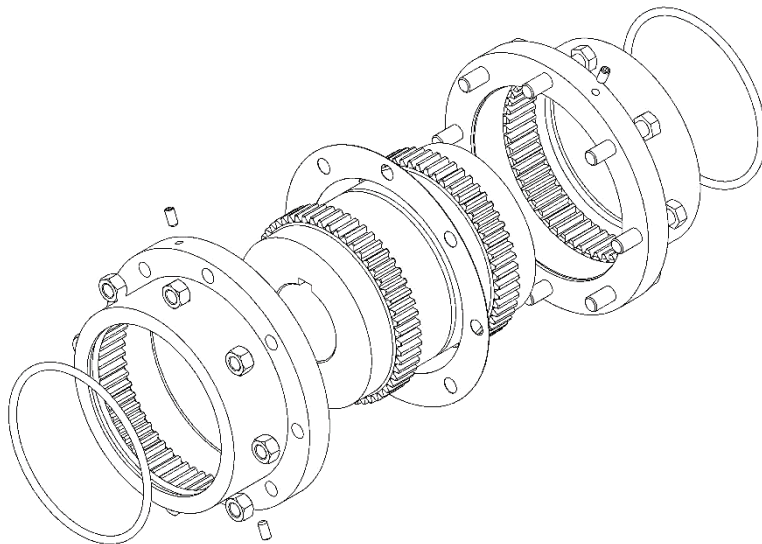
STEEL GEAR DOUBLE FLEX COUPLING (ISO)
